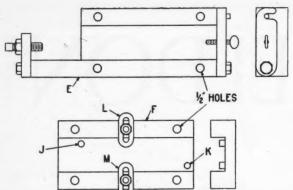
Drawing Showing Design of Cradles for Radial Milling
